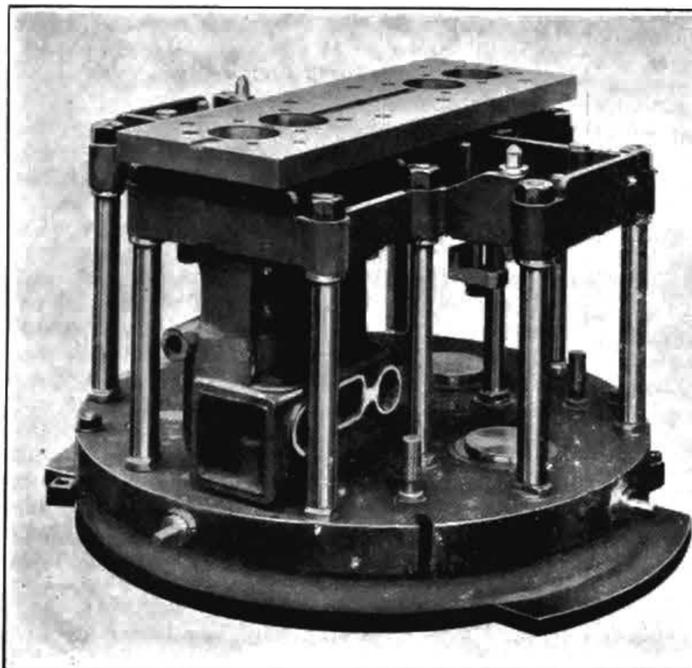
BORING FIXTURE FOR MOTOR CAR CYLINDER BLOCKS
